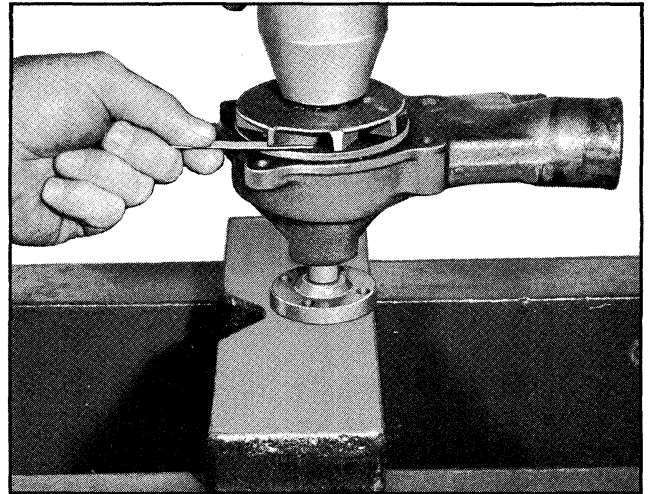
A-26 Checking Impeller to Pump Body Clearance
